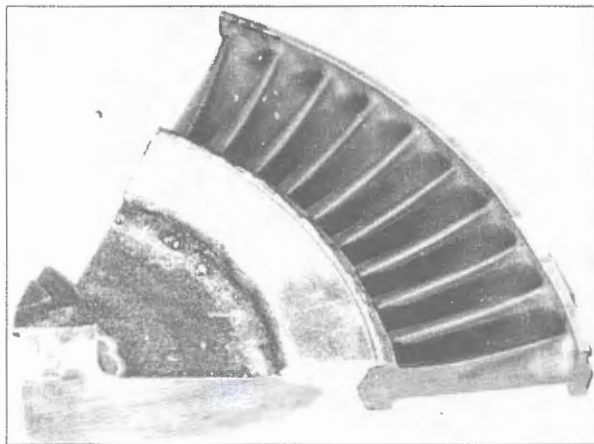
Appearance and macrostructure of specimen of a welded joint between the rotor with blades of alloy LJ1-I and disk of alloy EI698
